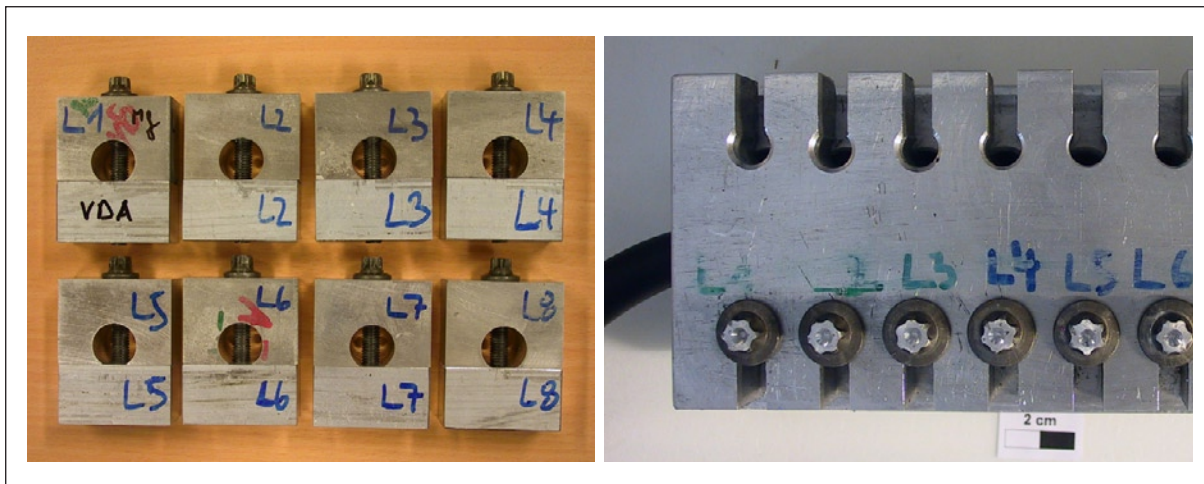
Bolted joints for stress crack corrosion testing
